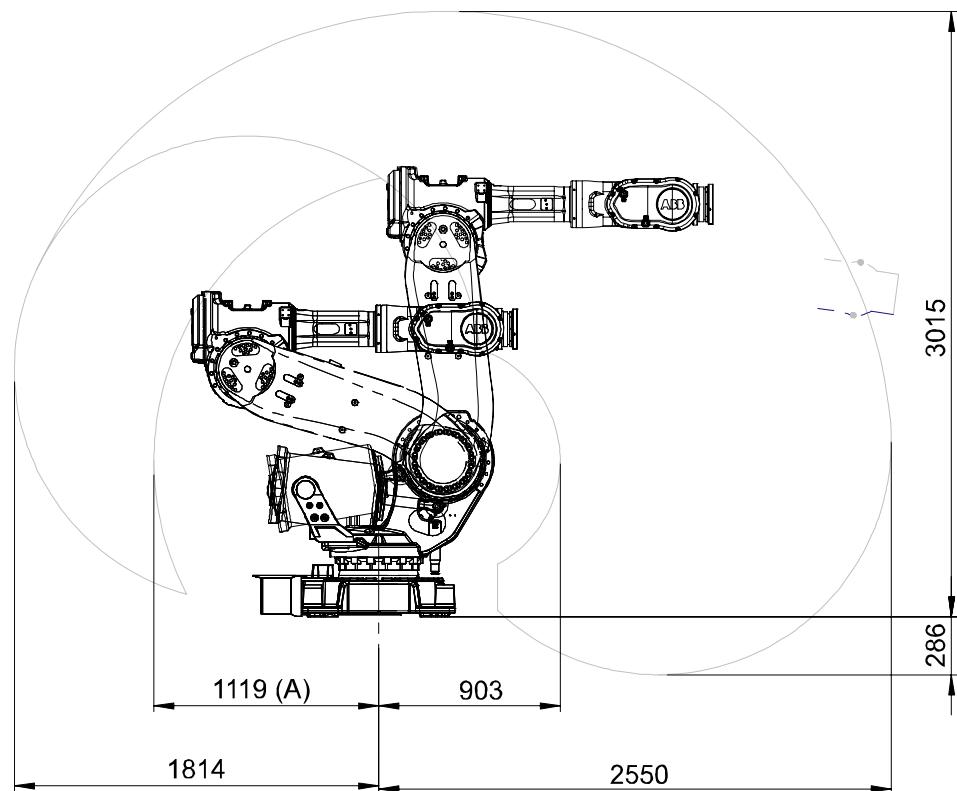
The extreme positions of the robot arm specified at the wrist center (dimensions in mm).
